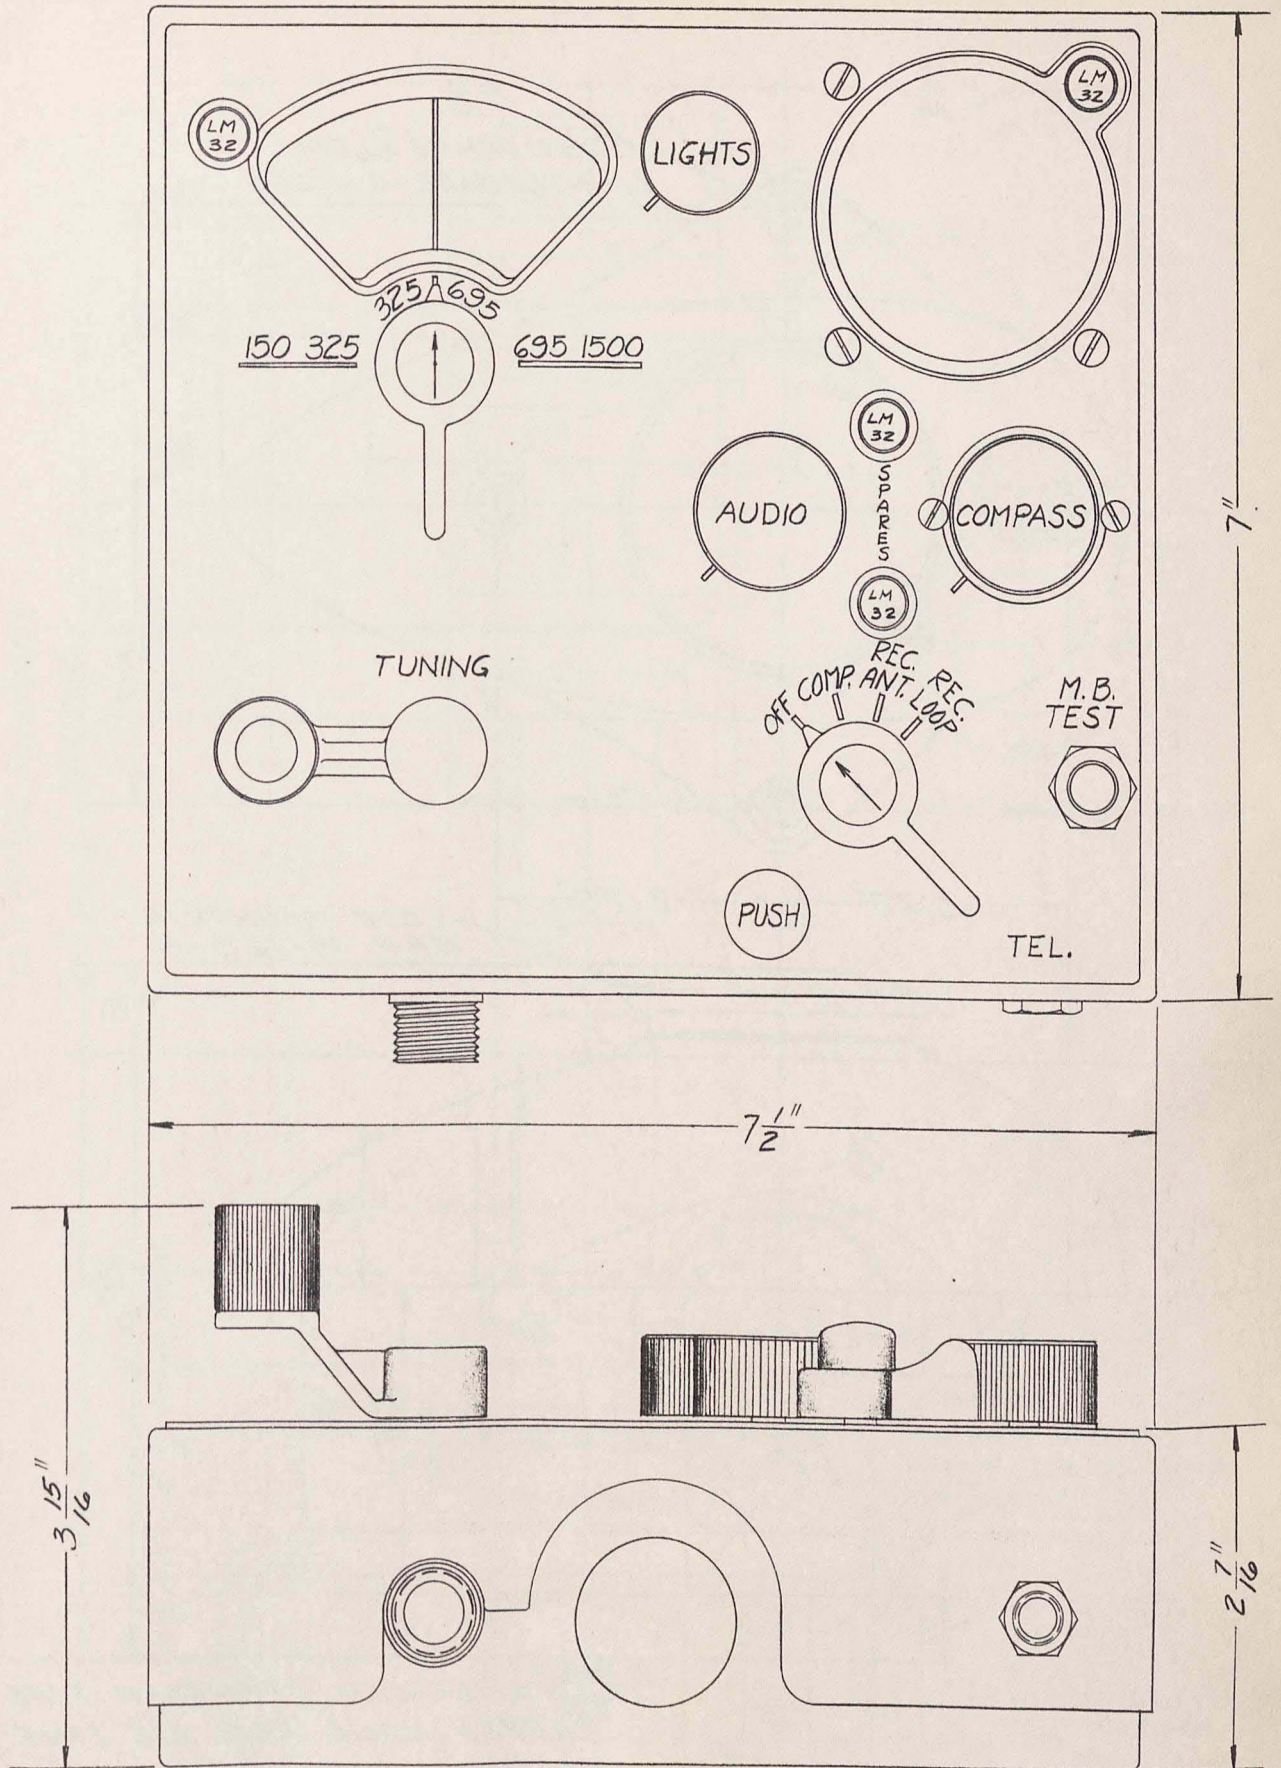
OUTLINE DRAWING—RADIO CONTROL BOX BC-311-B
